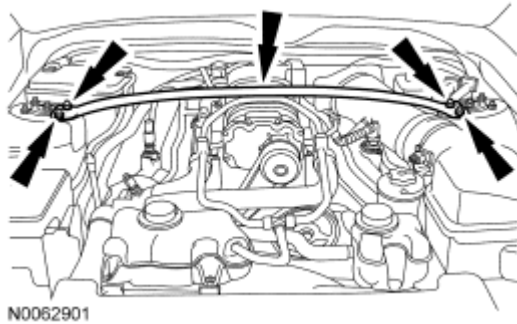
Locating Strut Tower Cross Brace & Nuts
